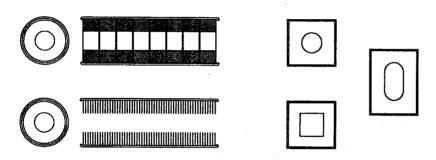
Matrix transformer cores can be assembled in a metal tube or jacket. The upper assembly is a stack of small ferrite toroids. The lower one is a stack of metal or amorphous metal washers.
